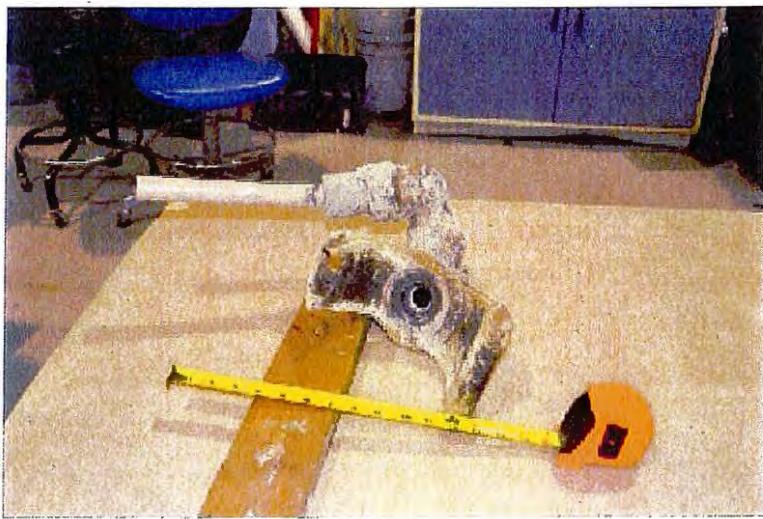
The saddle fitting assembly, bottom view. Note plastic service pipe is askew.
